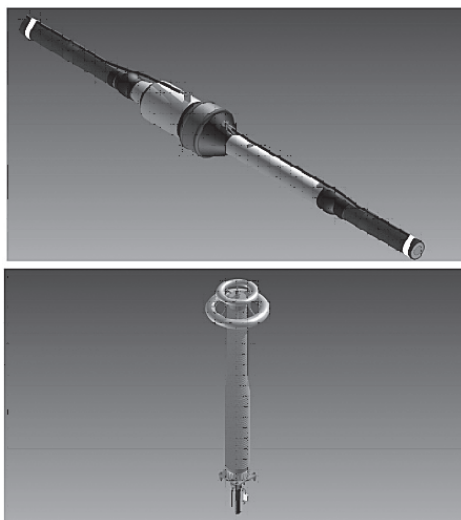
525 kV sectionalised joint and 525 kV Outdoor Termination
